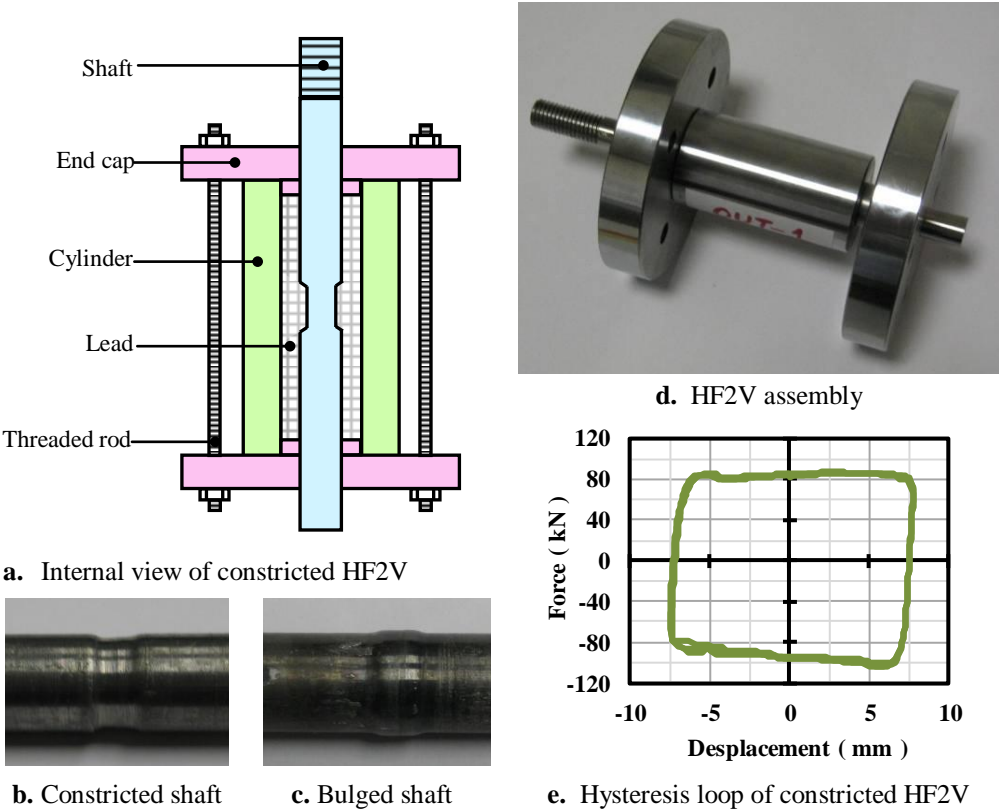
Internal view, shaft configurations, assembly and hysteresis loop of HF2V devices
